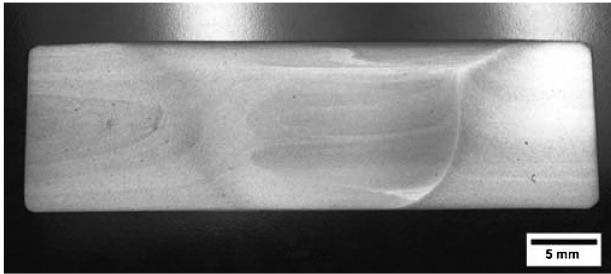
Typical short-transverse macrostructure of a friction stir weld in GRCop-84.
